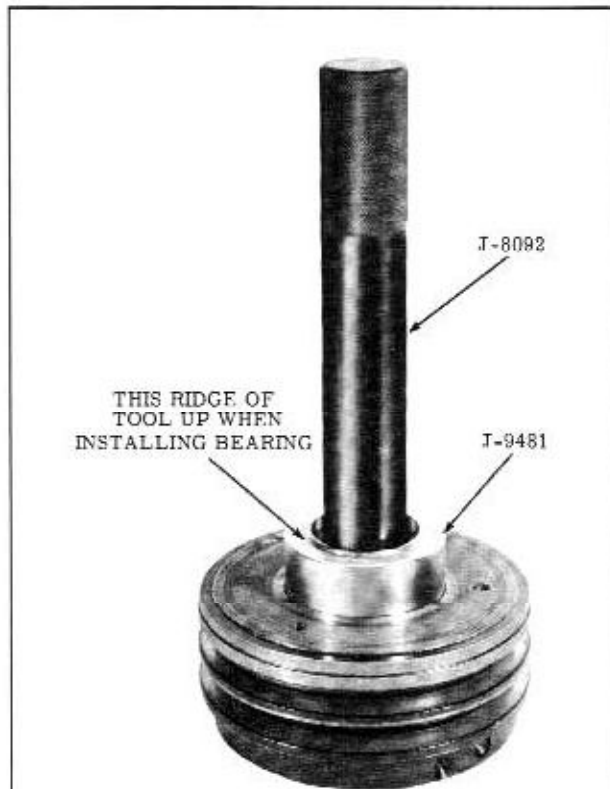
Installing Pulley and Drive Plate Bearing
